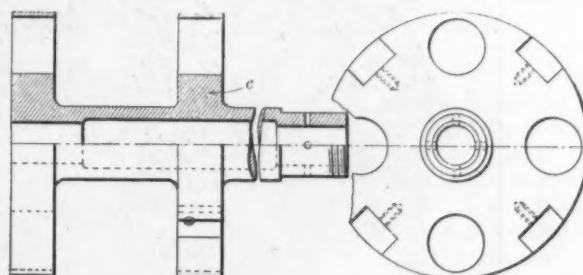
Detail of the Turret or Spindle Carrying Cylinder.
